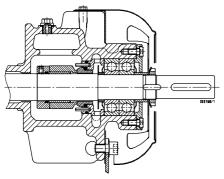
Mechanical seal in "dead end" arrangement
